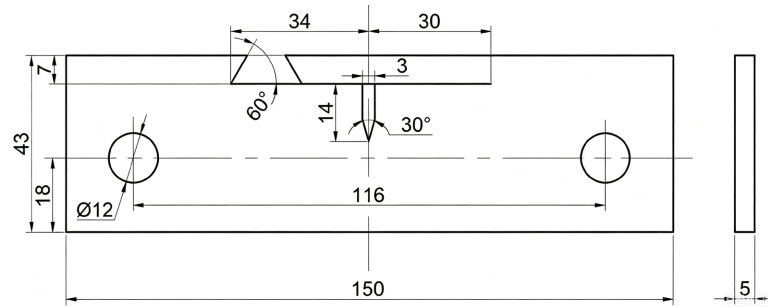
Dimension drawing of fatigue crack growth specimen (mm)
